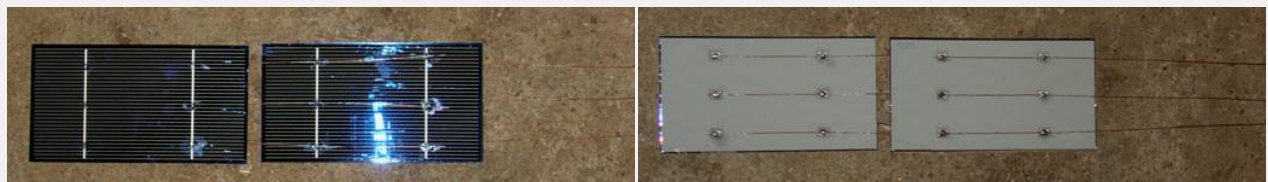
Cells are soldered together in series. Top view (left) and bottom view (right) are both shown
